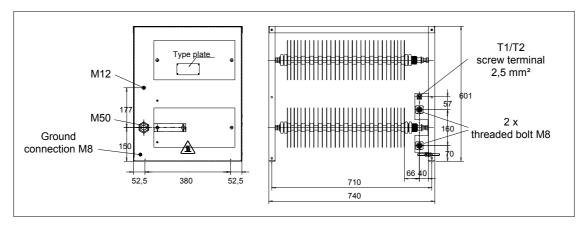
Dimension drawing of the braking resistor for option L61
